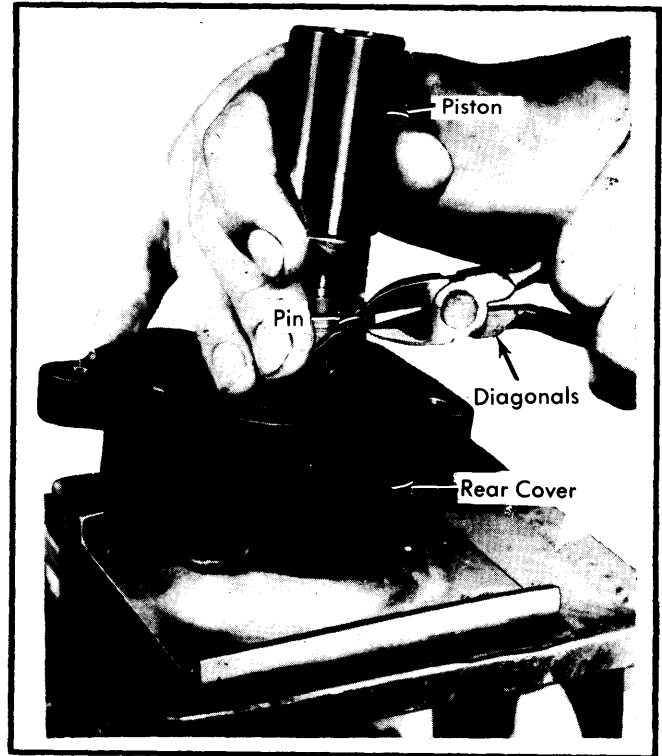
Using Diagonal Pliers to Remove Booster Power Pin (Cadillac Shown)
